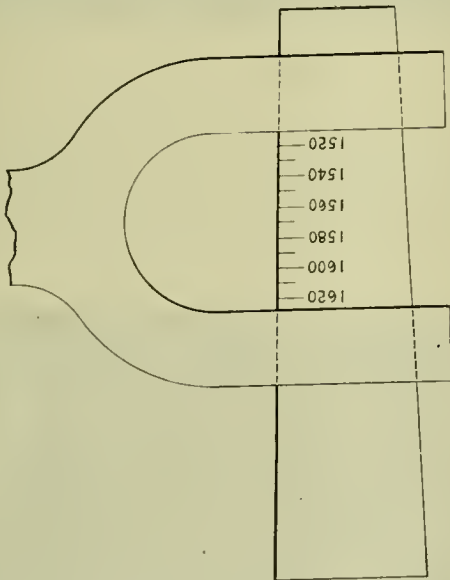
Flat Gage for Checking Accuracy of Taper Reaming
